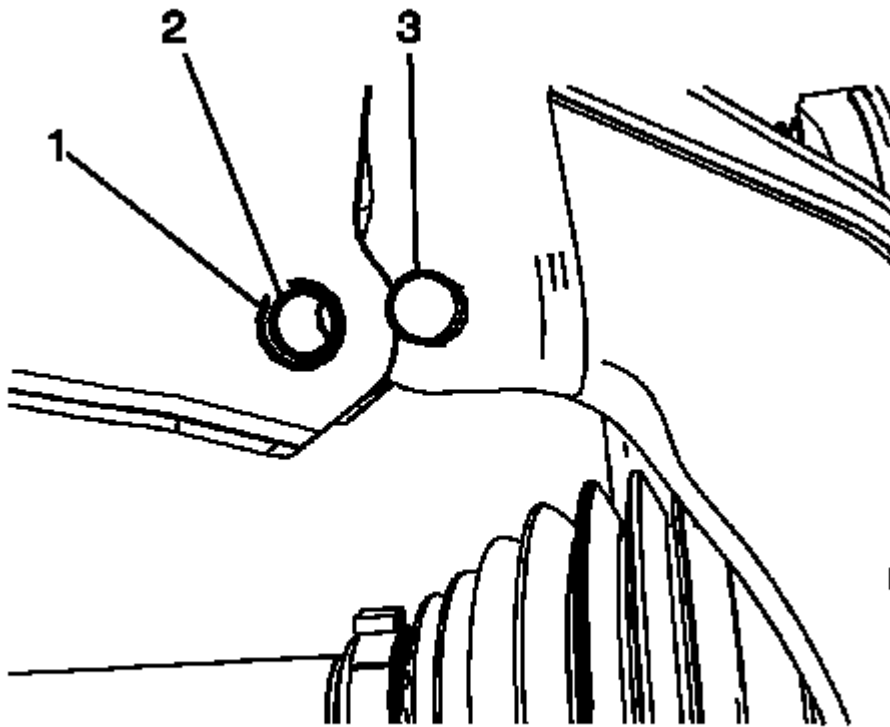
Front Strut Lower Bolt Inner And Outer Holes
